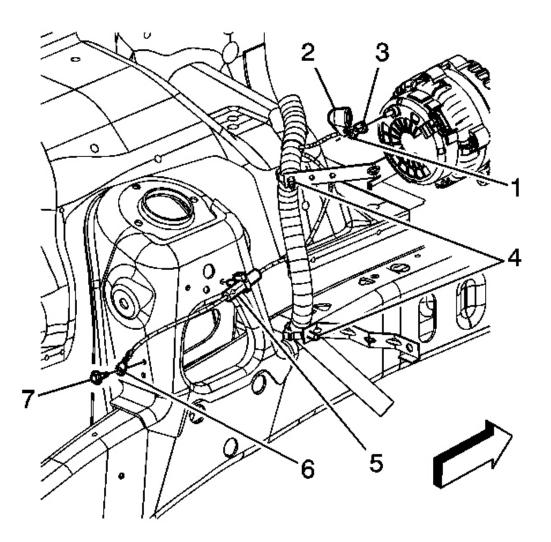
View Of Negative Battery Cable Ground Terminal At Engine Block Courtesy of GENERAL MOTORS CORP.
